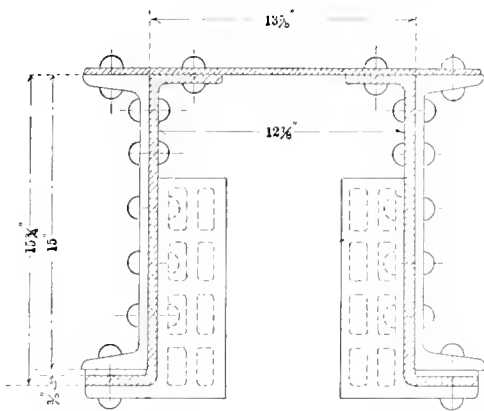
CROSS-SECTION OF EXTENSION CENTER OR DRAFT SILLS ON N-10 AND N-10A HOPPERS.
